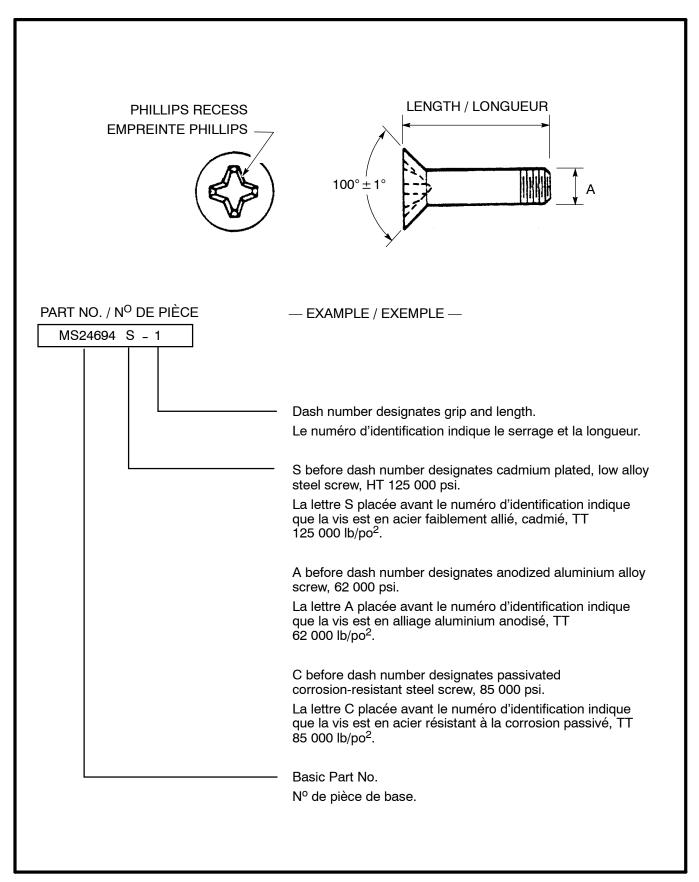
(Sheet 1 of 3) Screw, Machine, Flat Head, 100 Degree Countersunk, MS24694 Figure 6-11 (feuille 1 de 3) Vis à métaux à tête plate, fraisées 100 degrés, MS24694
